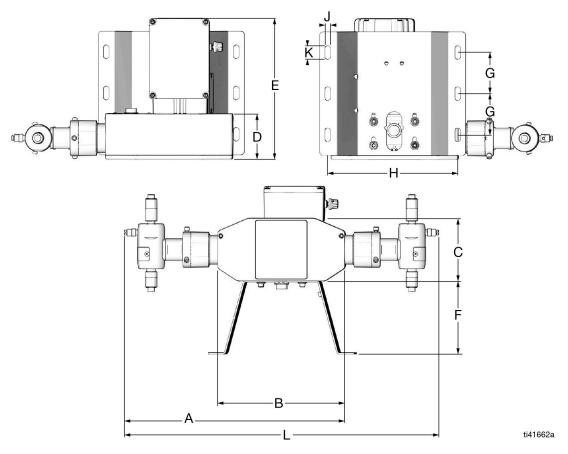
Wolverine Continuous Injection Pump Dimensions
